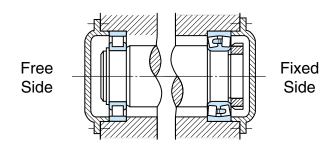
N-Configuration Cylindrical Roller Bearing as Free Bearing
